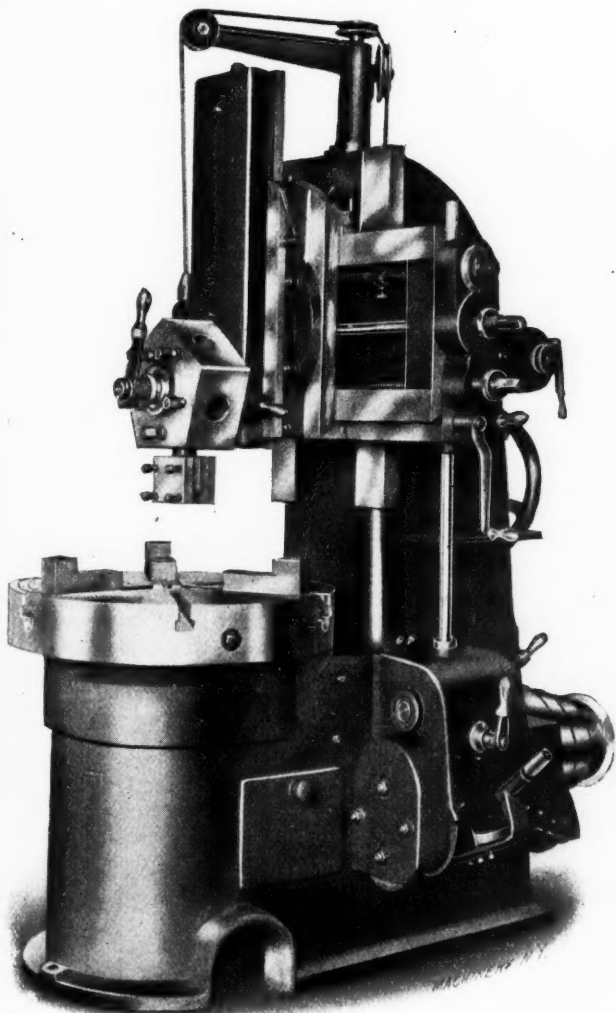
The Flather 30-inch Vertical Turret Machine.
